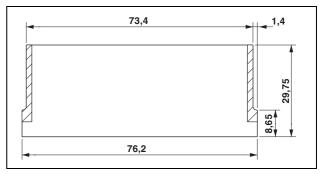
Dimensions of the PCB with housing cover ME-IO 18,8 C 7U 7035
